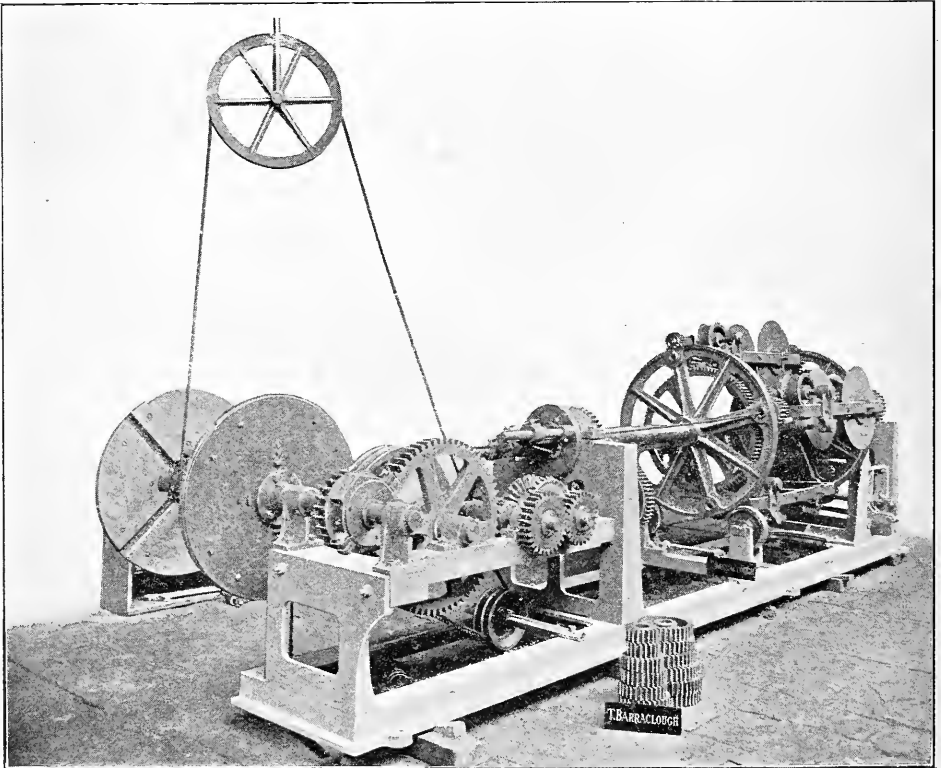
Horizontal 3- and 4-strand closing machine.
